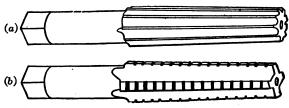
Taper reamers (a) finishing; (b) roughing.
